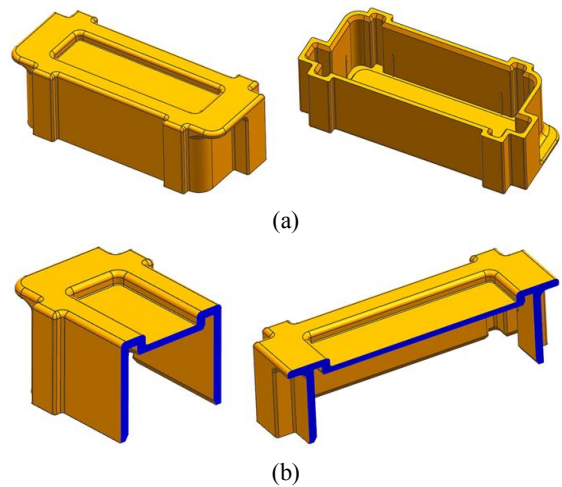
Geometry of the TCC((a) 3D shape, (b) section shape)
